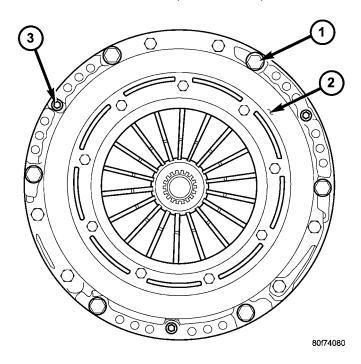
Pressure Plate-to-Flywheel Bolts—Turbo
